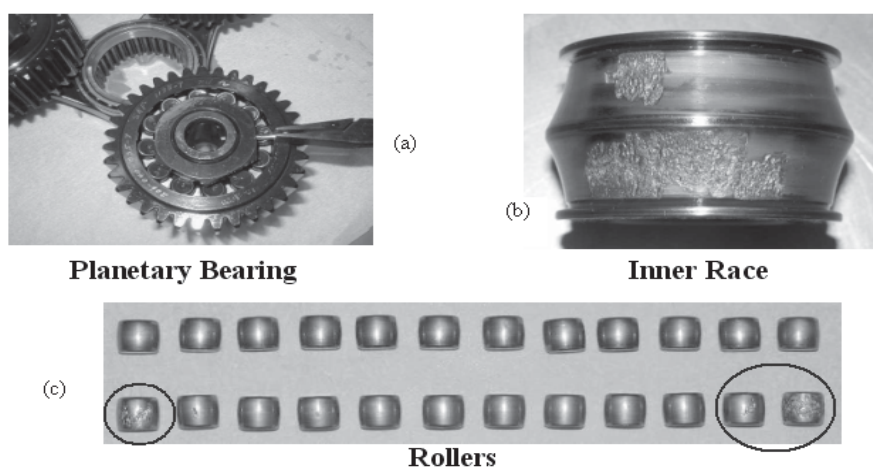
(a) defective bearing, (b) spalled inner race (c) defective rollers.
